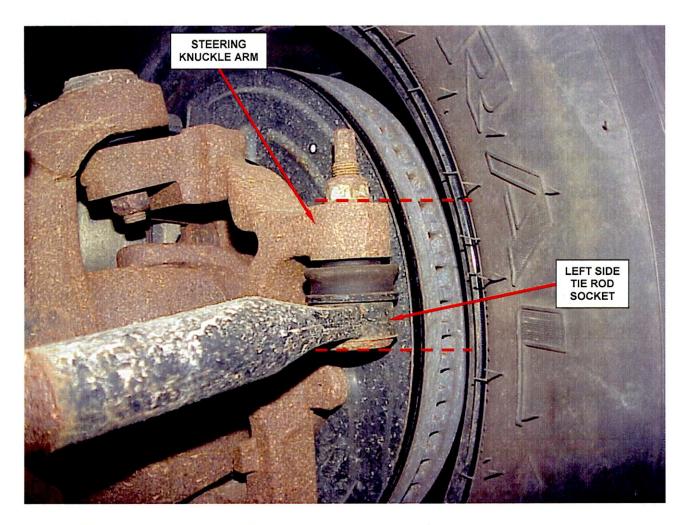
Align Left Tie Rod Socket Parallel to Left Steering Knuckle
